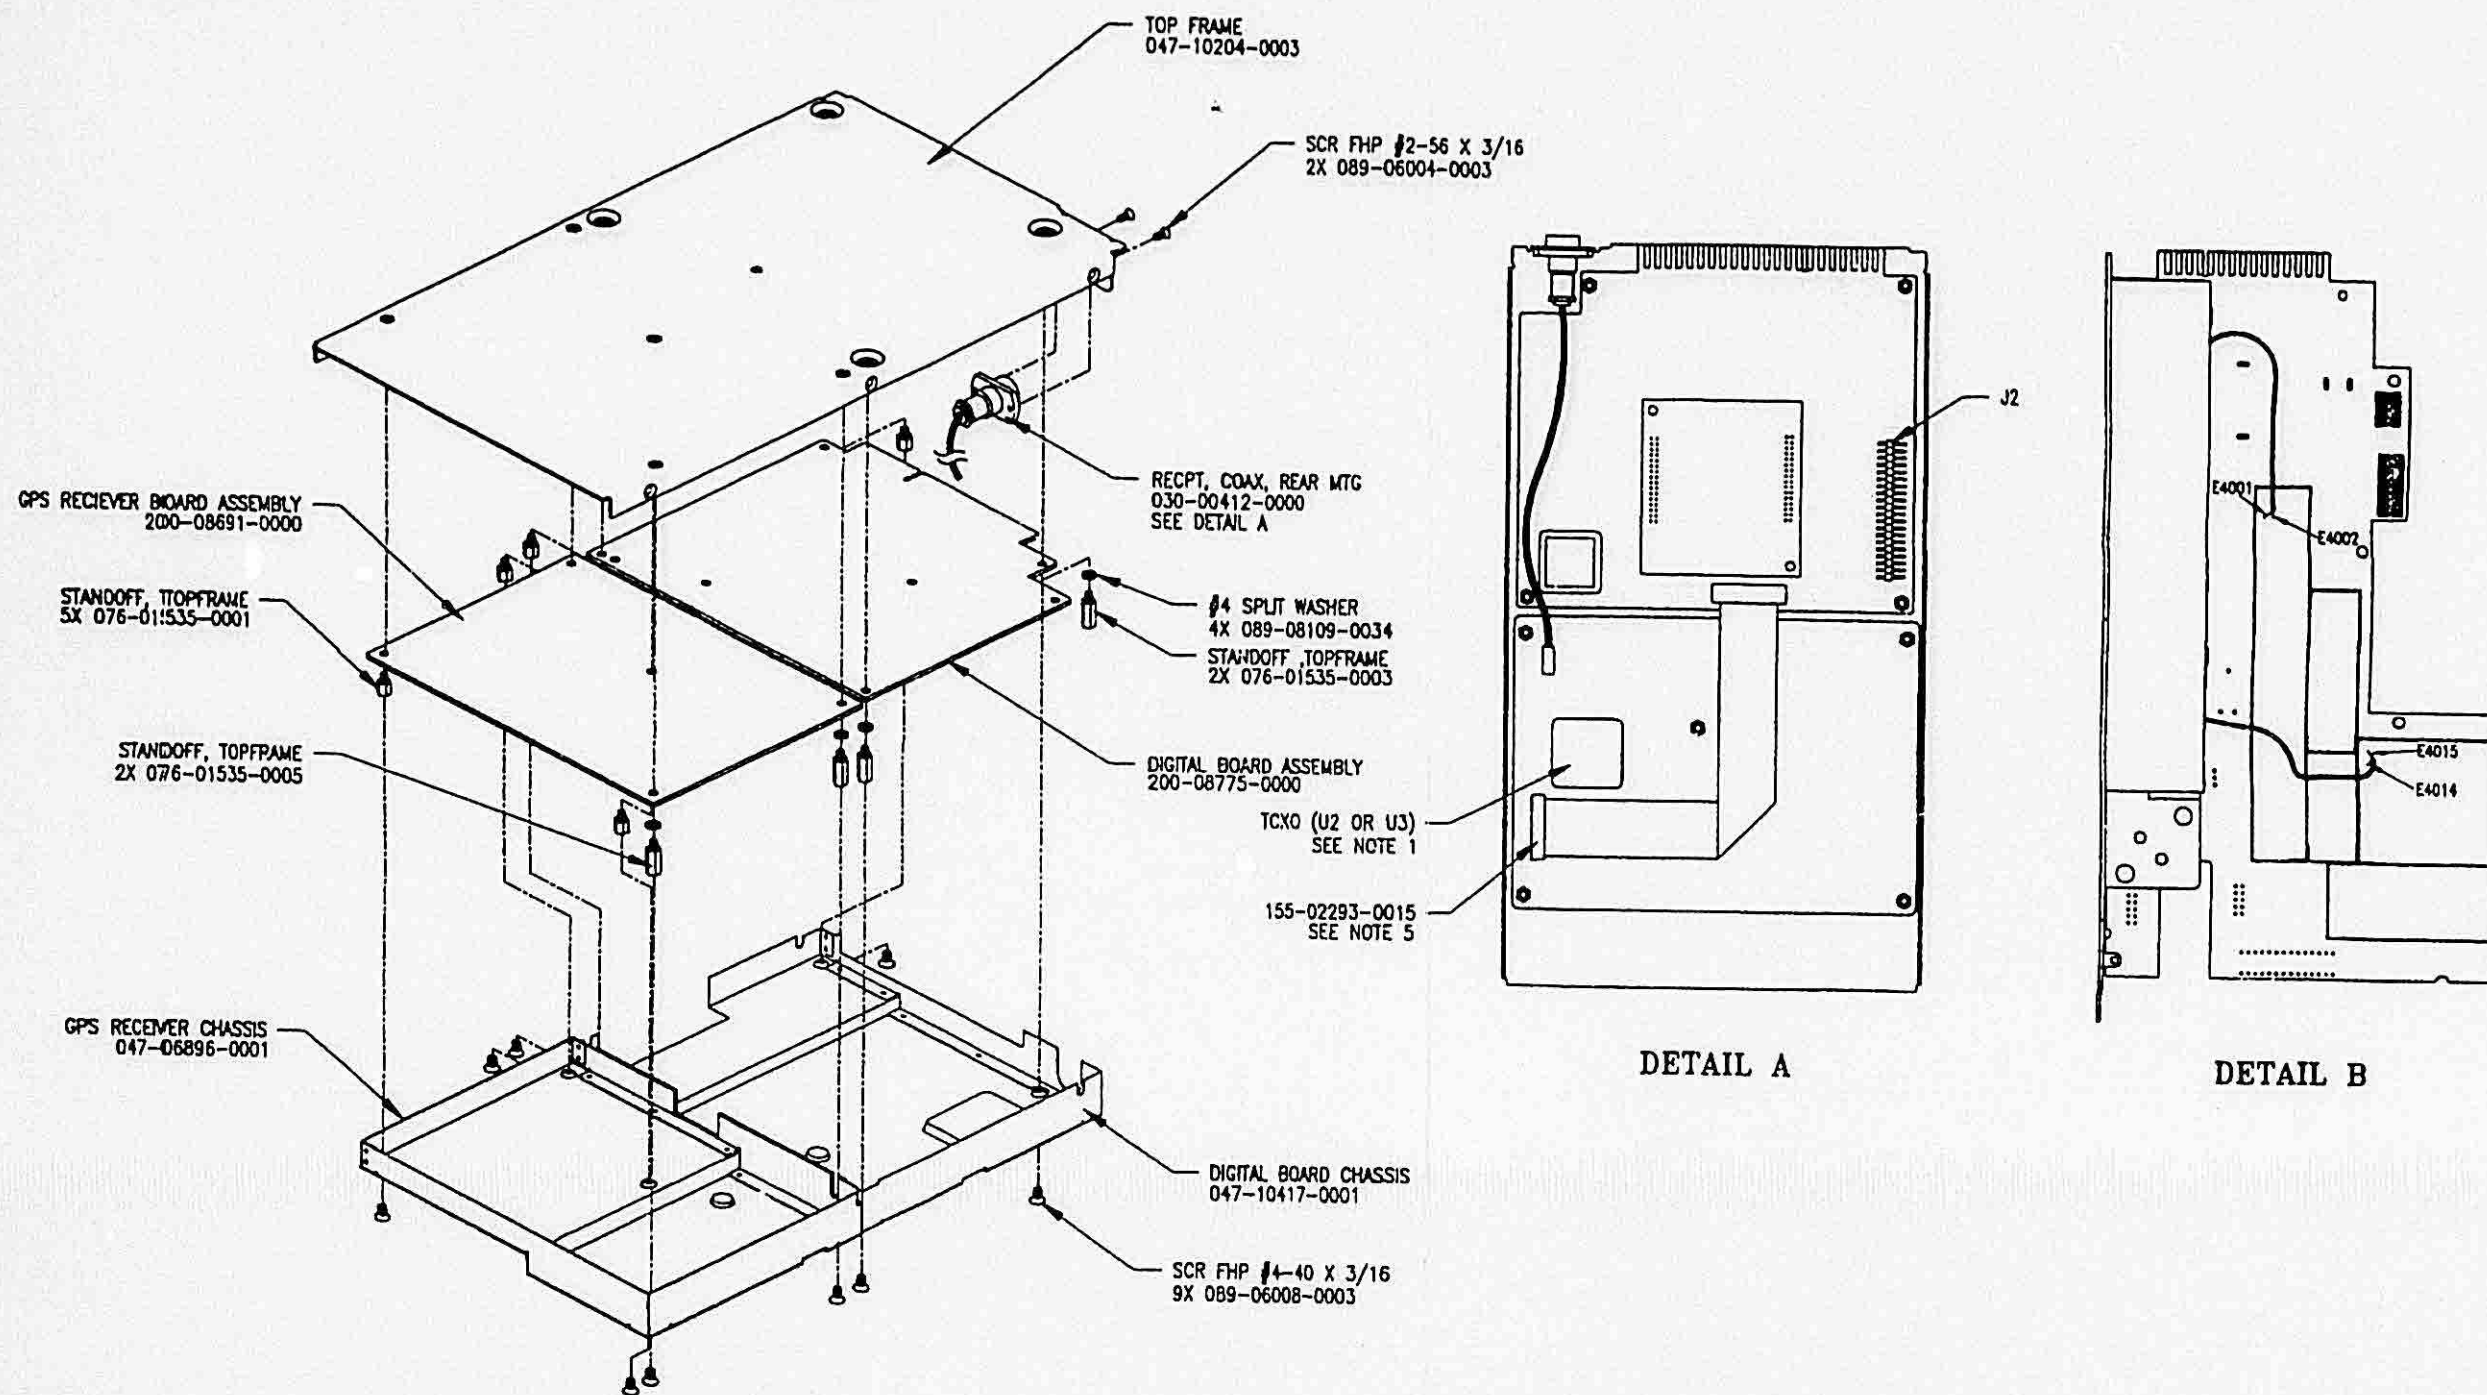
KLX 135 FINAL ASSEMBLY
